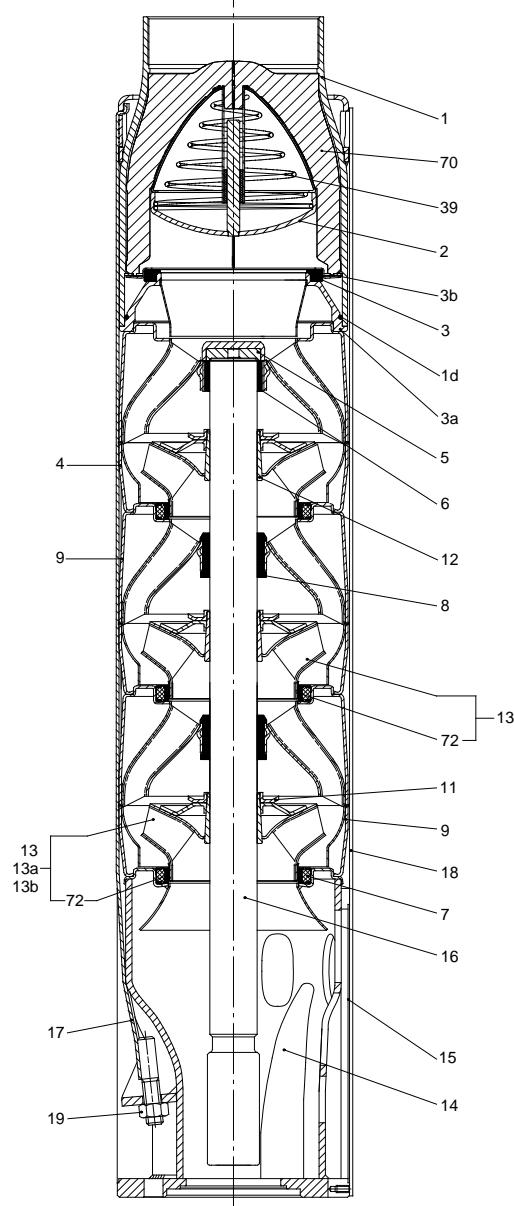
SP pump, 10" (SP 625S - 1100S)
